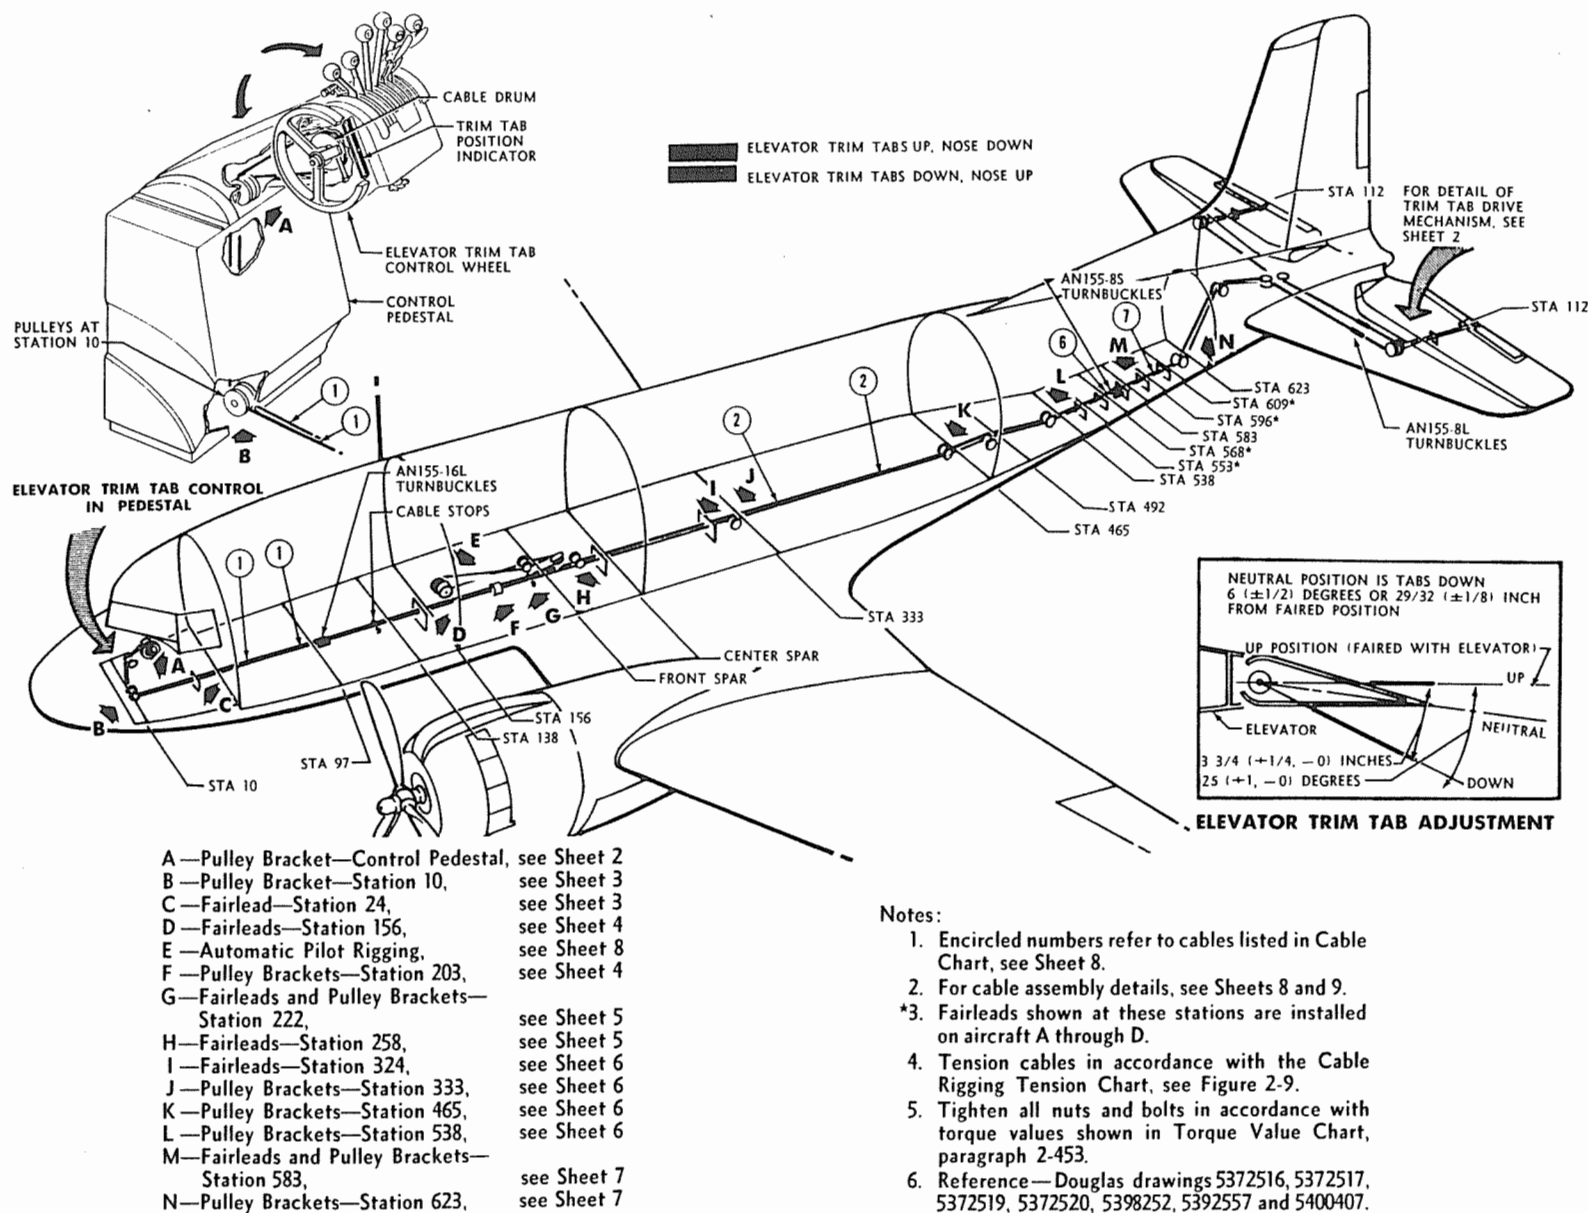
(Sheet 1 of 9 Sheets). Elevator Trim Tab Control System — Key Drawing
